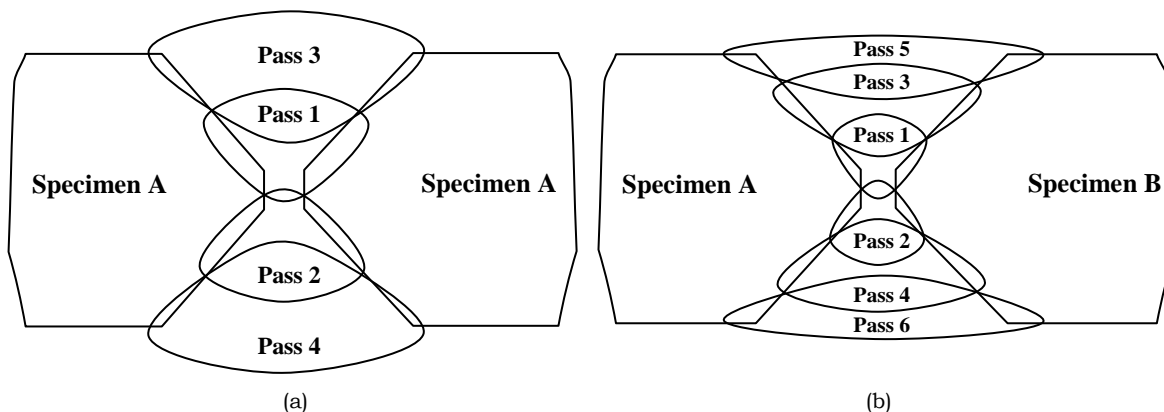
Welding sequence followed in (a) similar welding and (b) dissimilar welding.
